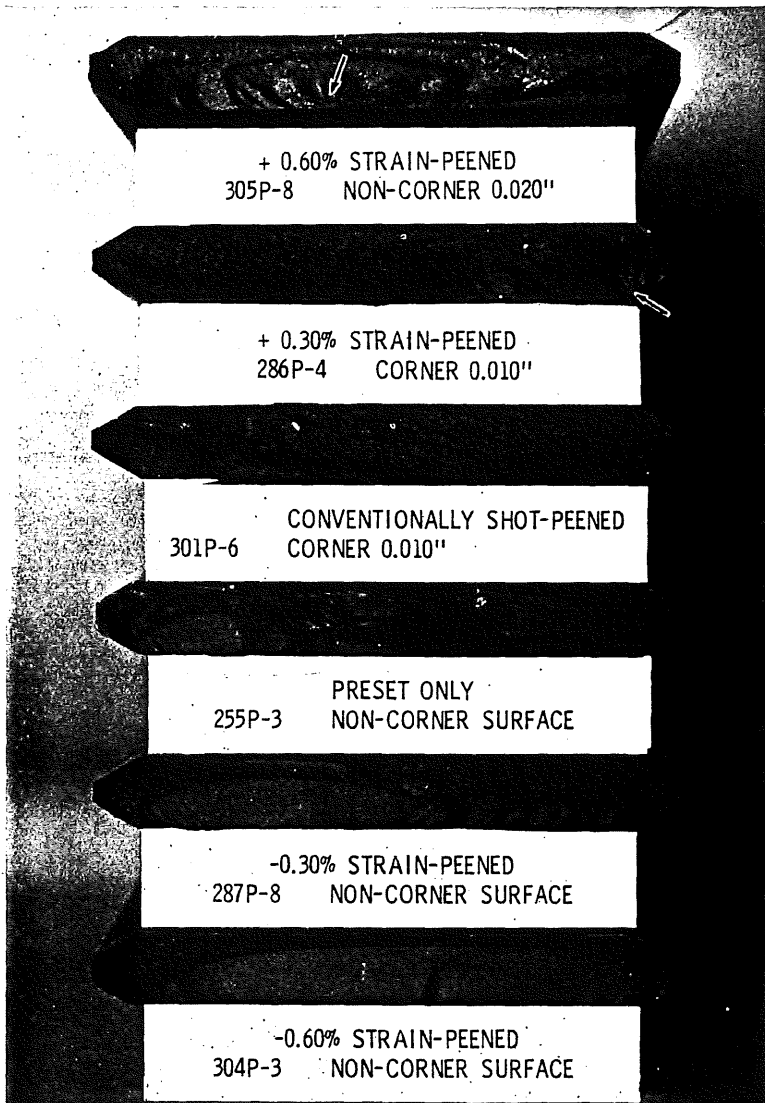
Fatigue fractures of leaf-spring specimens showing fatigue failure origins.
